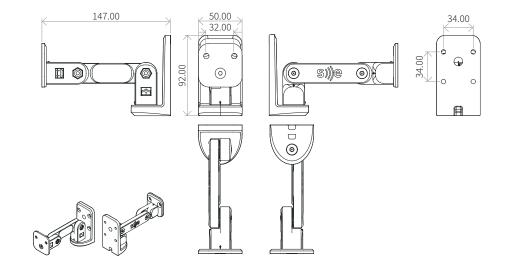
SMBX views and dimensions. Annotations given in millimetres.
